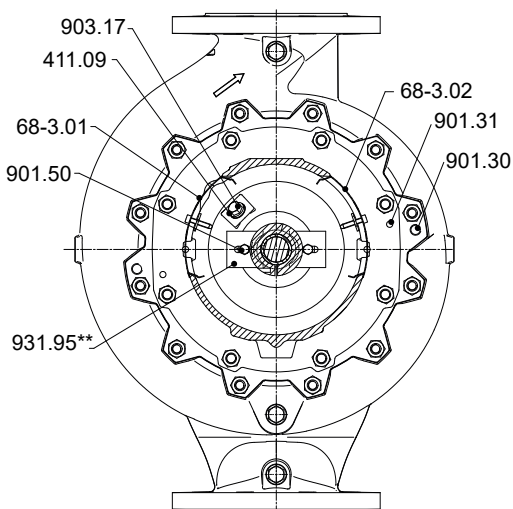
General assembly drawing: side view (\*\* pump in operation)
